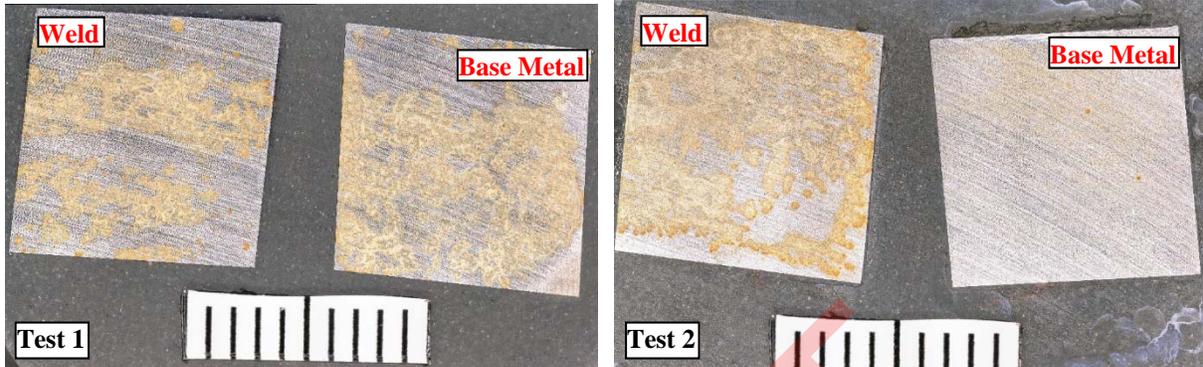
Low magnification morphology of Weld-Metal couple Sample 3.
